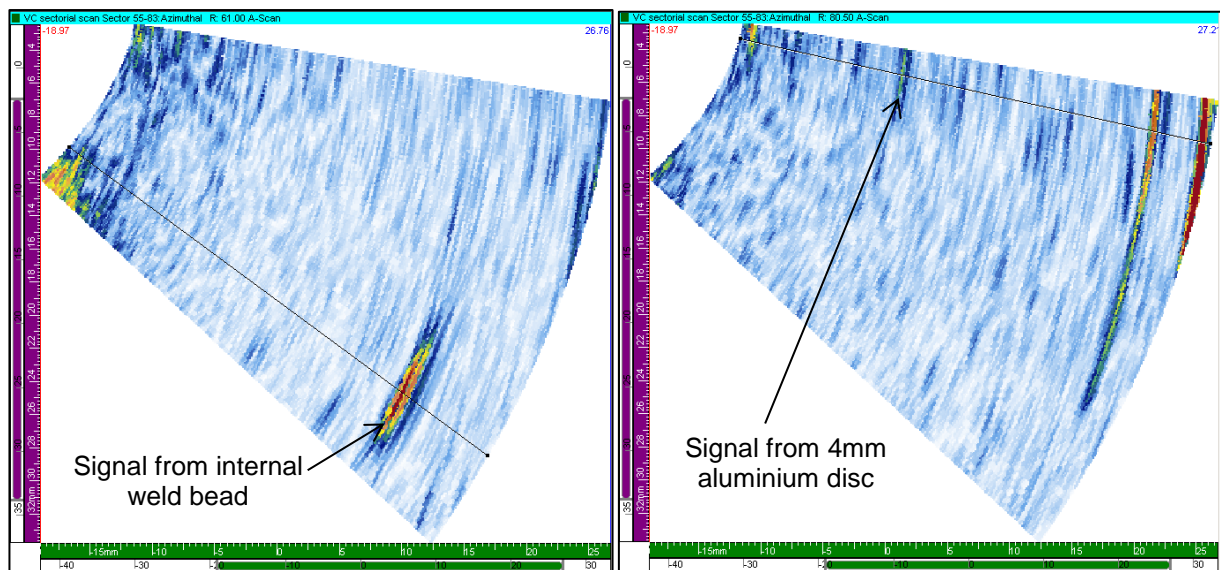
B-scan images of butt fusion welds in 225mm PE pipes: unflawed weld (left), and weld containing a 4mm aluminium disc (right).
